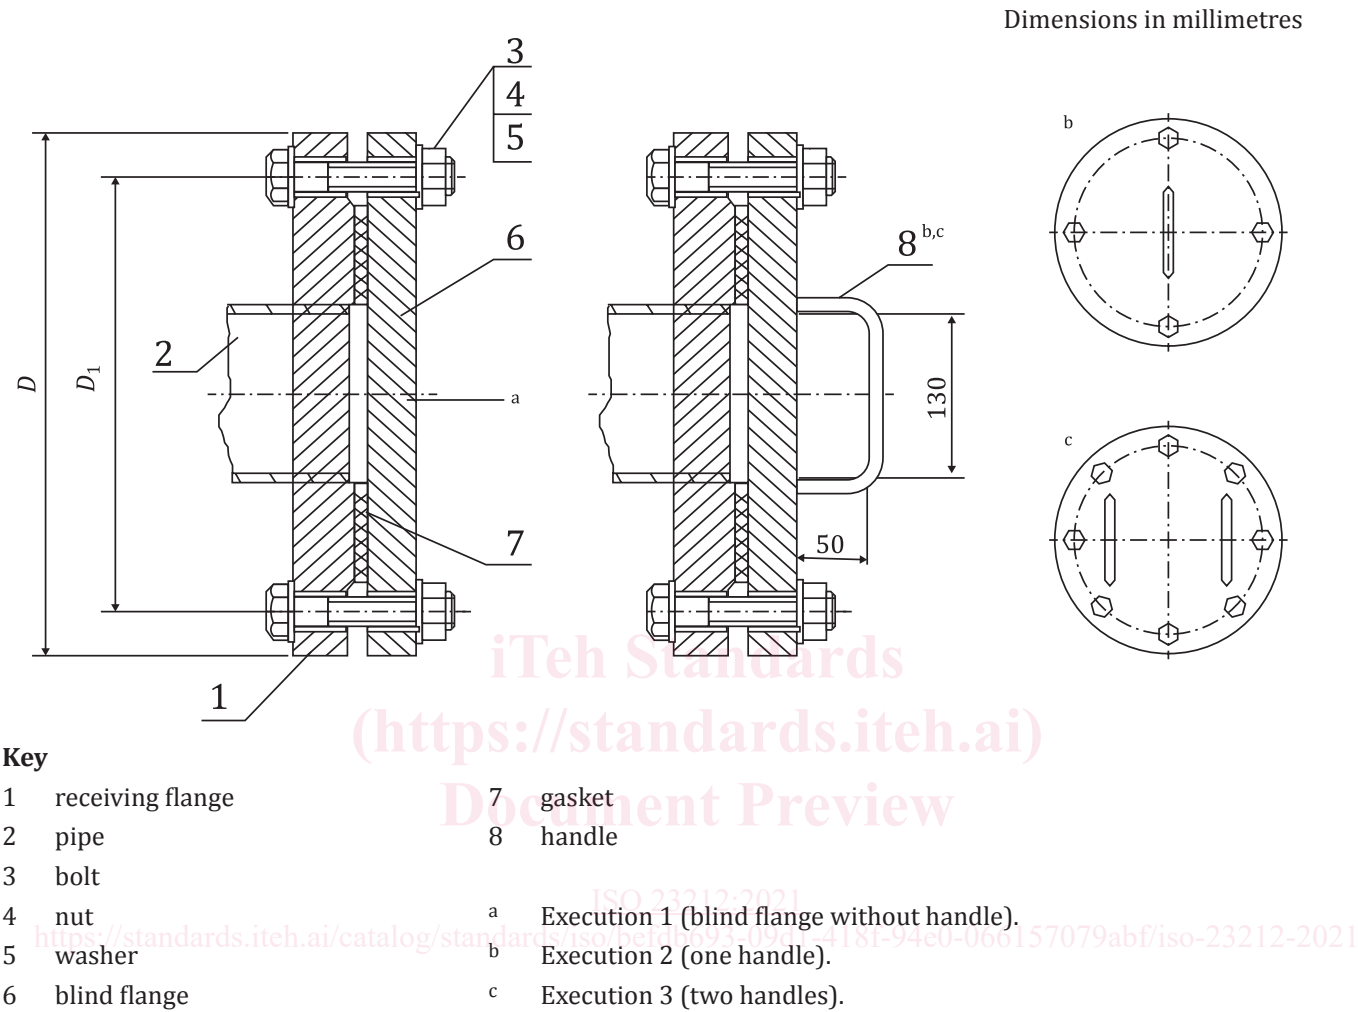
Flange connections for bunker fuel and lube oil transfer
